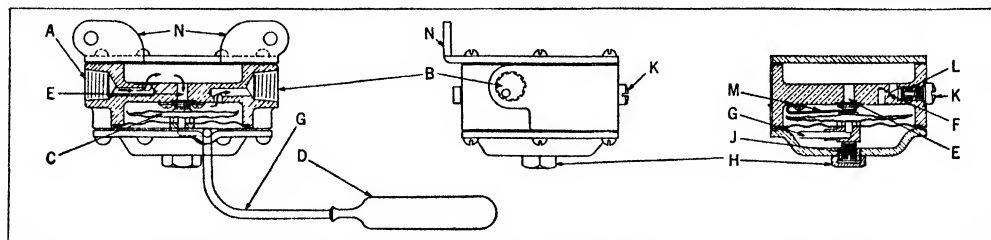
THERMOSTAT IN WHICH EXPANDING MEDIUM IS VOLATILE FLUID. A. FROM GAS SUPPLY LINE. B. GAS TO BURNER. C. DIAPHRAGM. D. BULB. E. MAIN VALVE. F. BY-PASS VALVE (NEEDLE TYPE). G. CAPILLARY. CONNECTING BULB TO DIAPHRAGM. H. HEXAGONAL CAP SCREW. J. ADJUSTING SCREW FOR LOWER OR HIGHER TEMPERATURE. K. SEALING CAP SCREW. L. ADJUSTING SCREW FOR BY-PASS VALVE. M. SPRING FOR OPENING MAIN VALVE; N. MOUNTING BRACKET
